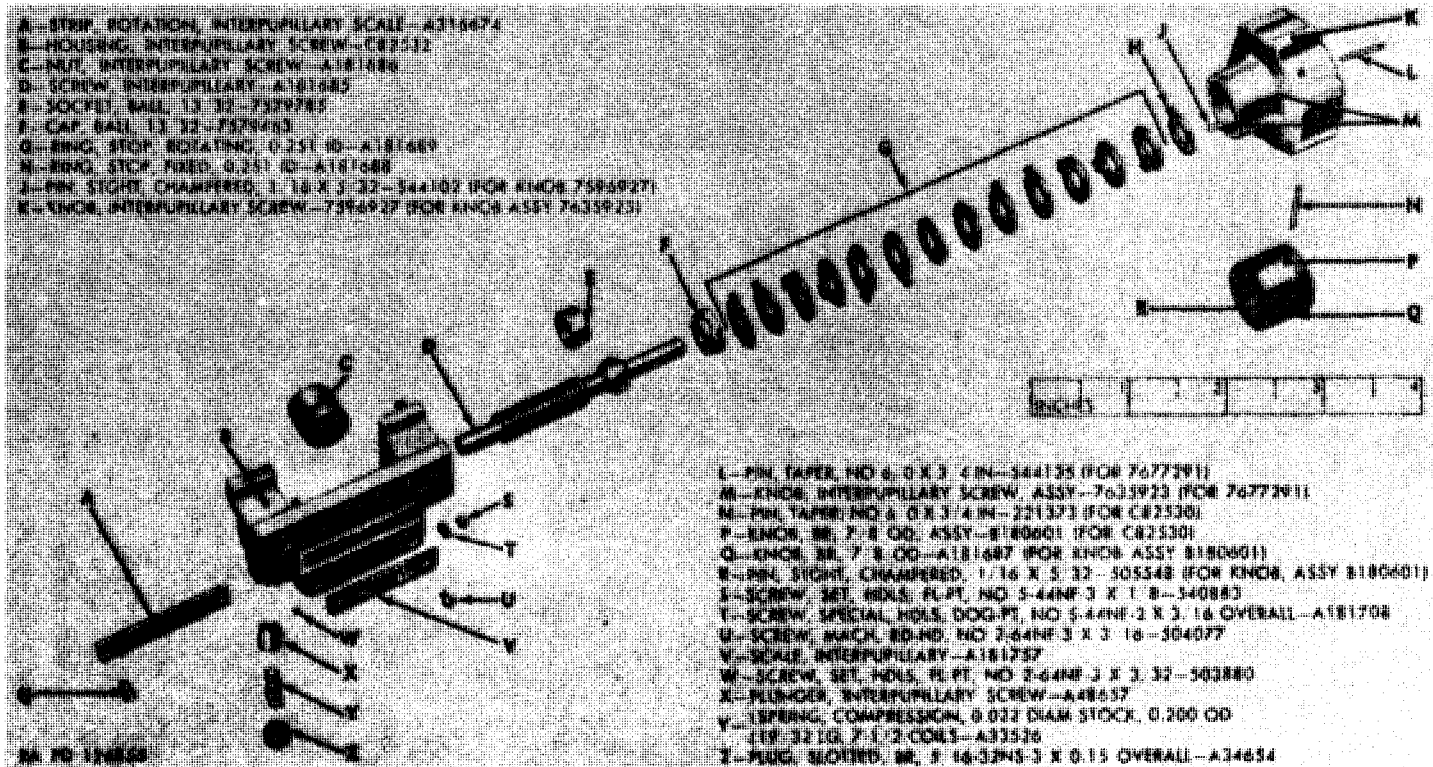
Interpillary screw assembly 7677291 or C82530 — exploded view.
